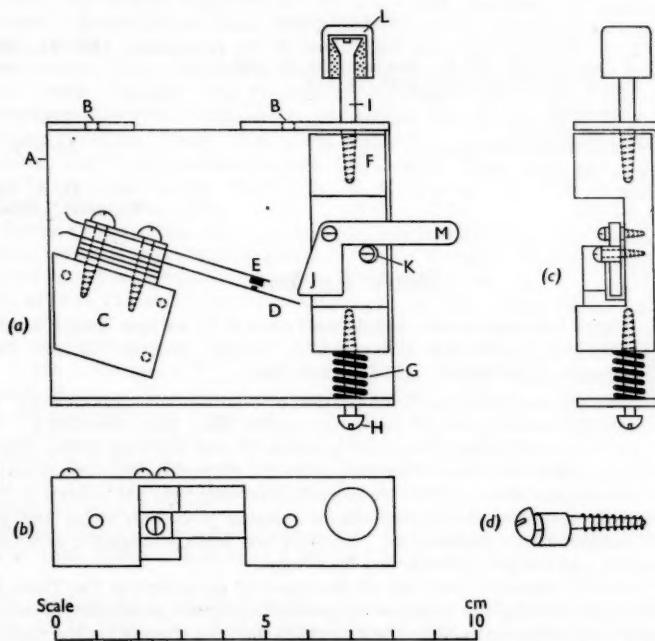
Details of "brief-contact" switch: (a), front view (sectional); (b), top view (diagrammatic); (c), side view (sectional); (d), enlargement of cam K.
